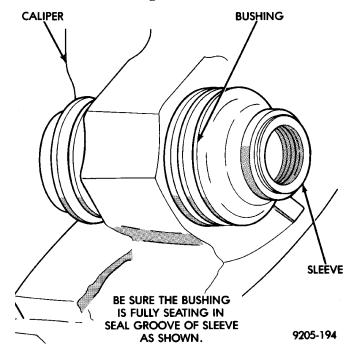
Correctly Installed Caliper Sleeve And Bushing
